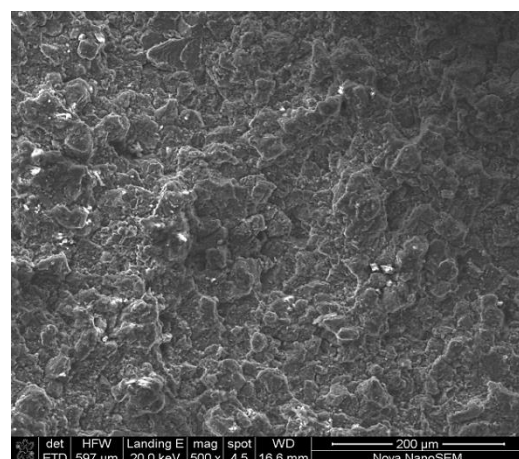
S430 Batch 2 WOL specimen showing intergranular SCC on fracture surface.
